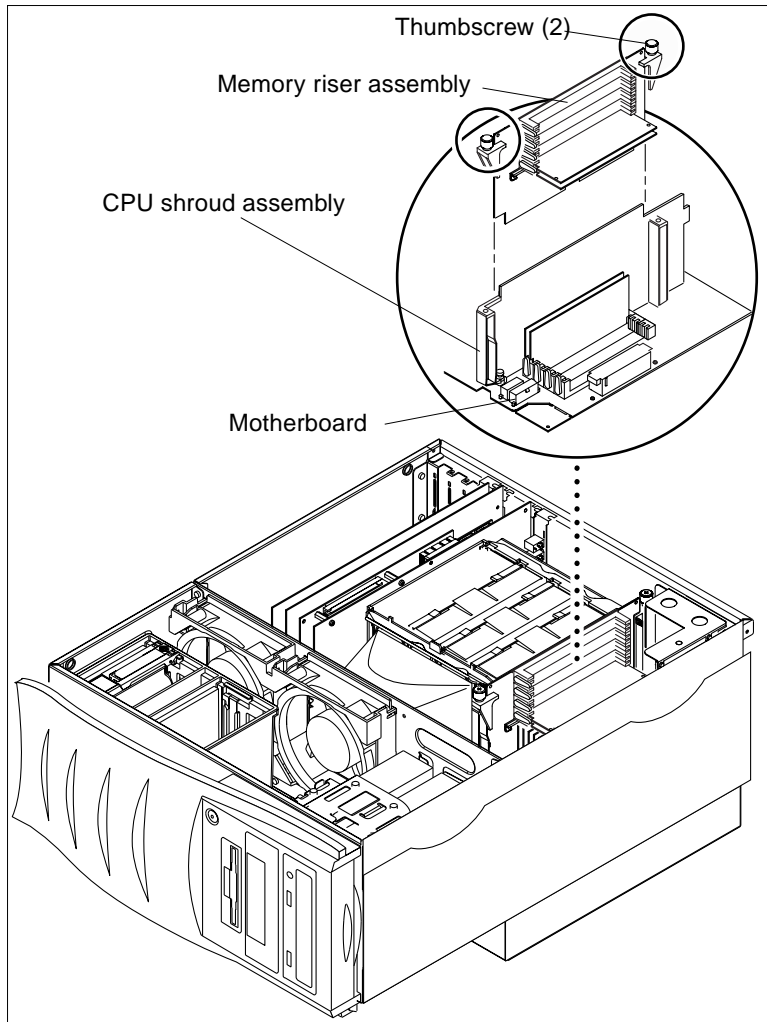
Removing the Memory Riser Assembly (Sheet 2 of 2)
